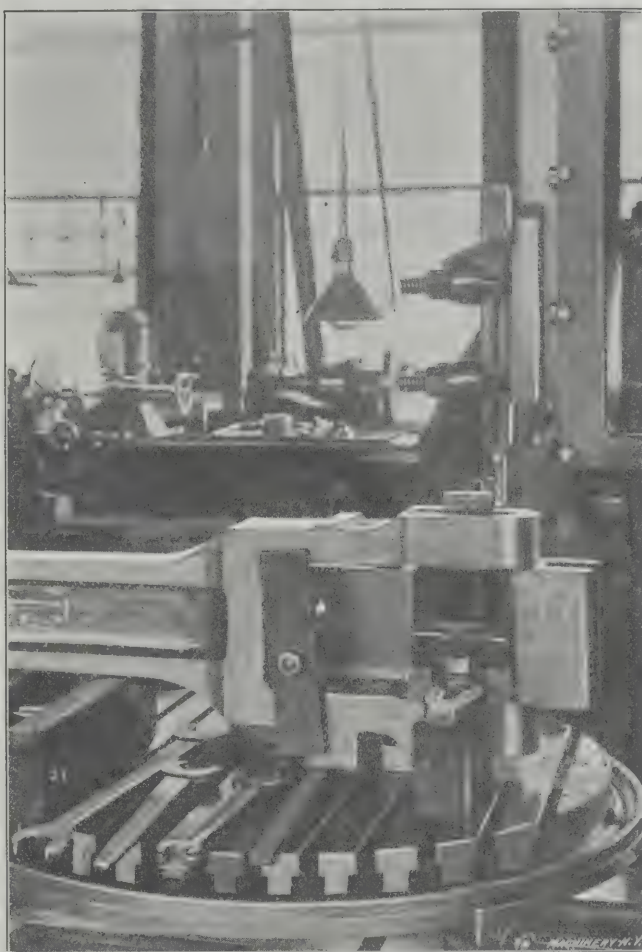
Working out the Keybolt Slot on the Slotting Machine
